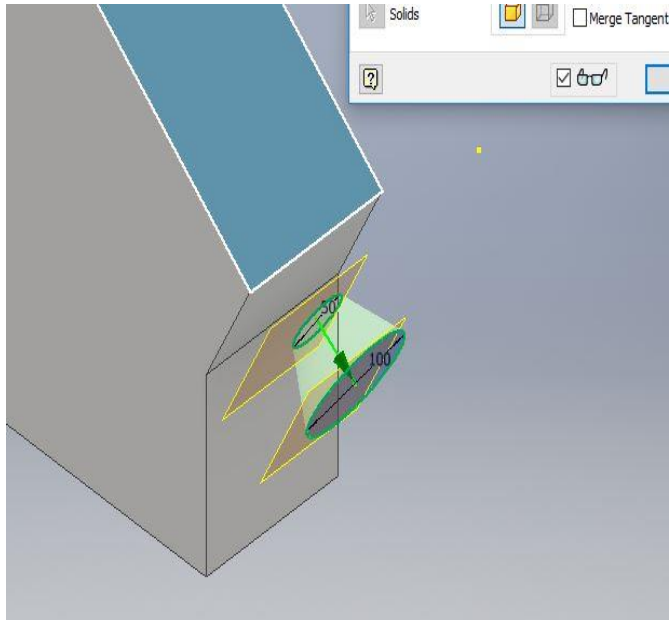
Using the “loft” tool to design the Air inlet nozzle
